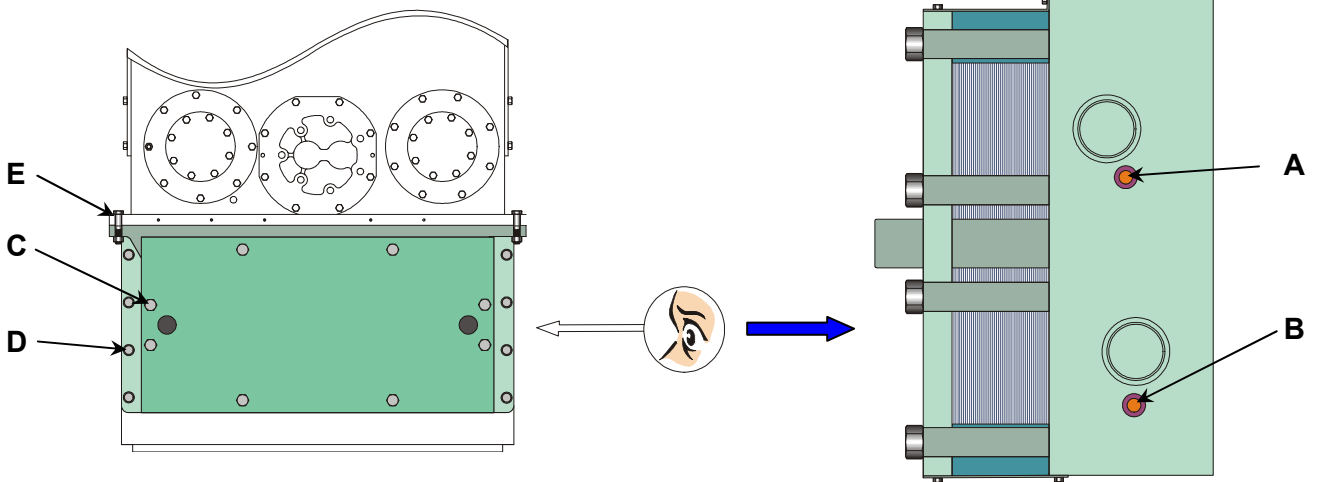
Dismounting of lubricating oil cooler (윤활유 냉각기의 분해)
